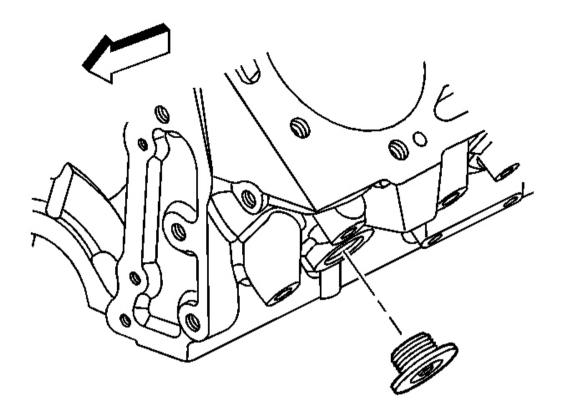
Left & Right Engine Block Coolant Drain Hole Plugs Courtesy of GENERAL MOTORS CORP.
